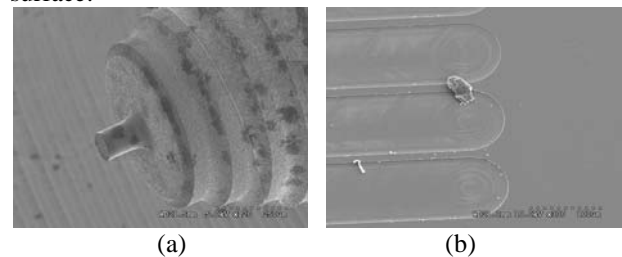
(a) SEM photo of a diamond grinding tool; (b) SEM photo of a machined glass surface
